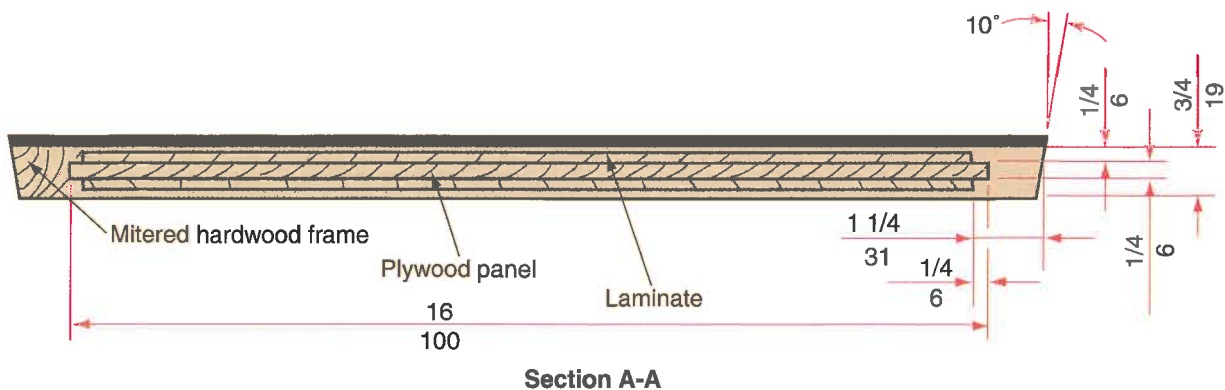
A section view is a cutaway view. It shows the materials of which the part is made.
